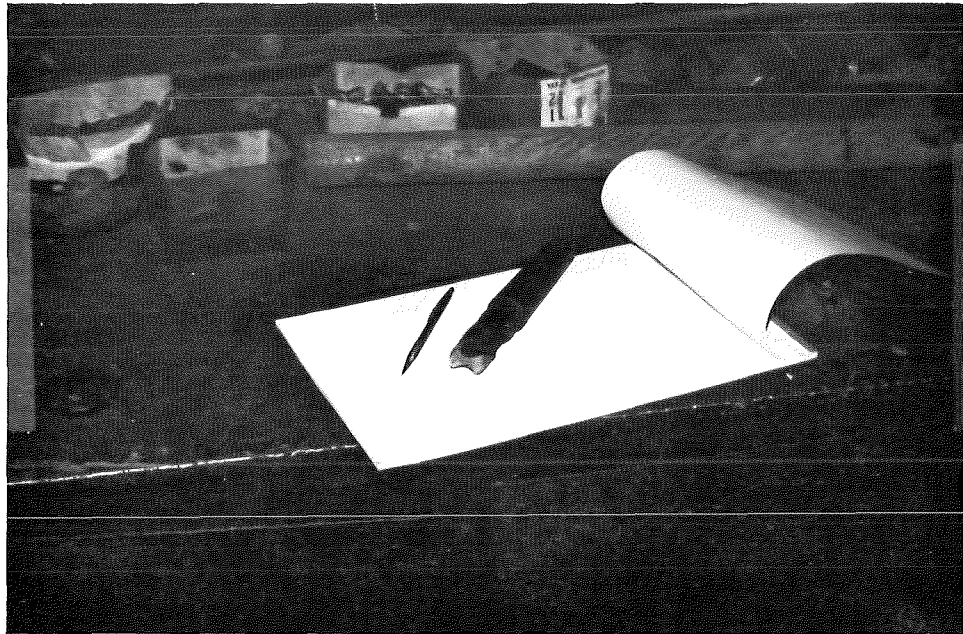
DRILL AUGER USED TO COUNTERSINK HOLES IN GOODYEAR ARMAPLATE.
